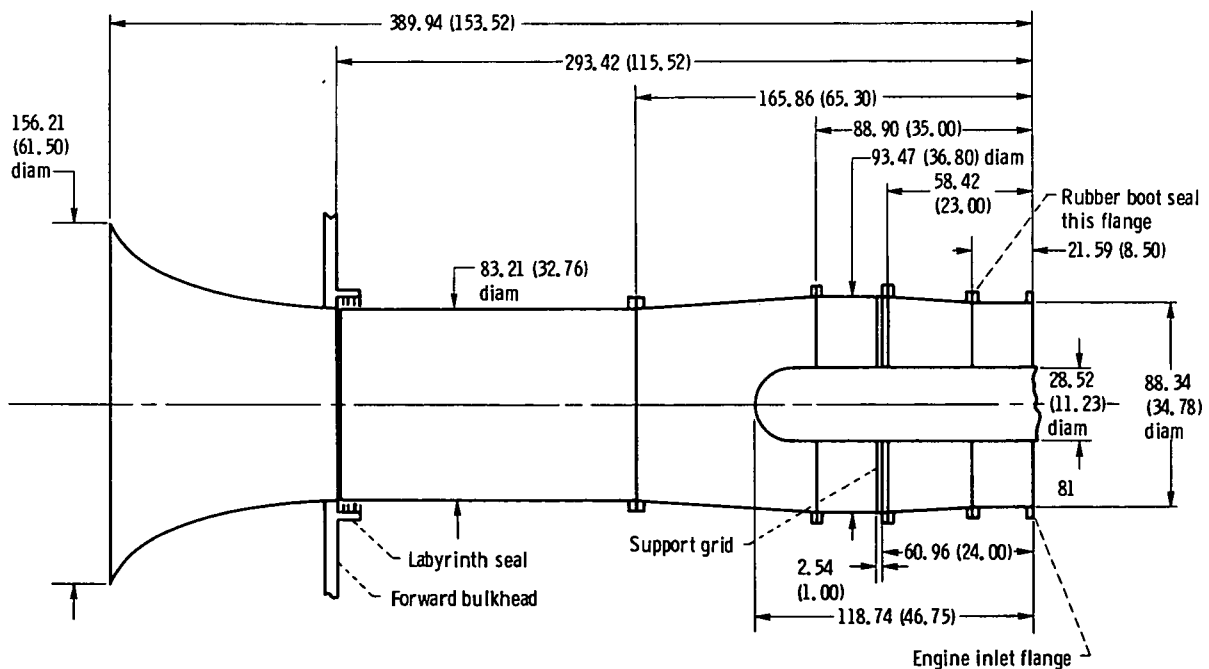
Engine inlet detail. (Drawing not to scale. Dimensions are nominal in cm (in.).)
